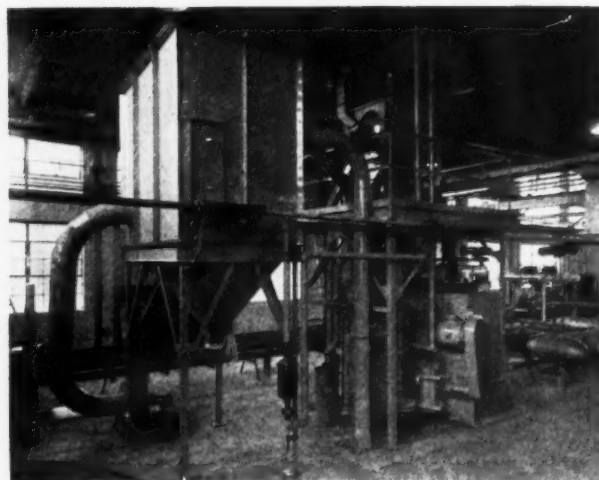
Side View of Bomb-cleaning Machine Shown in Fig. 1
